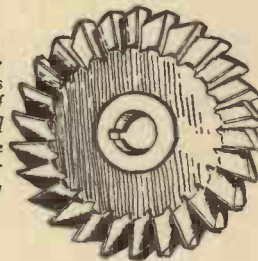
This type of cutter is known as a roller or cylindrical cutter
